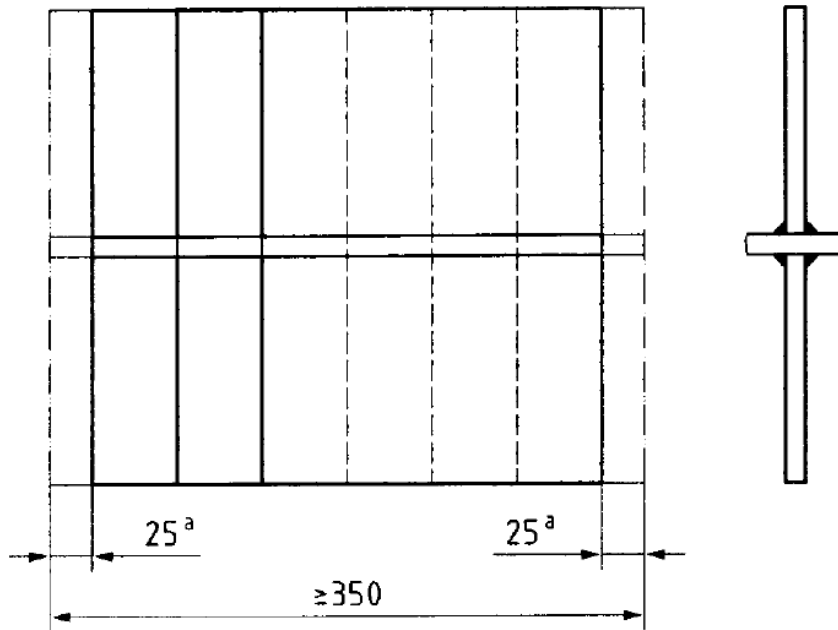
Location of specimen from a cruciform joint. *a* End pieces are to be discarded.
